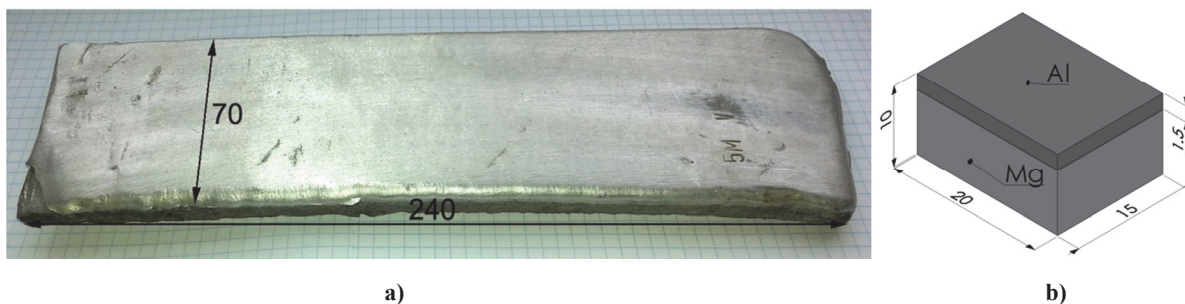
Shape of Mg/Al stock after explosive welding – a) and a CAD model of the Mg/Al specimen used for the compression test – b)
